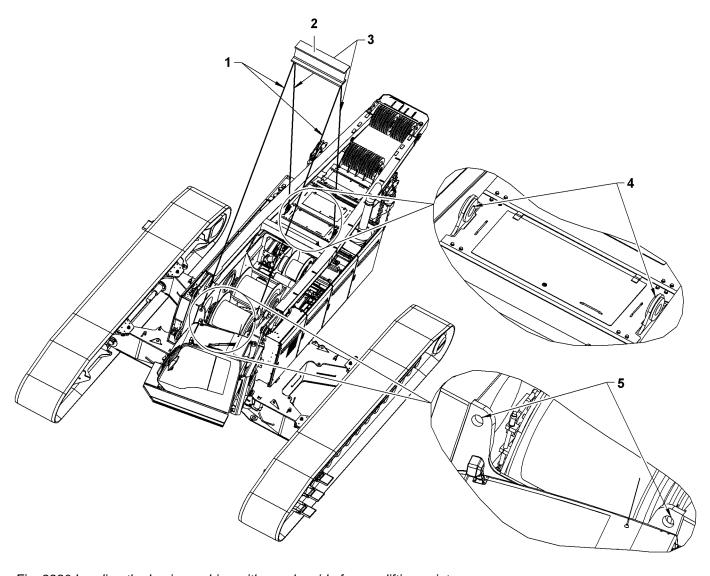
Loading the basic machine with crawler side frame - lifting points
